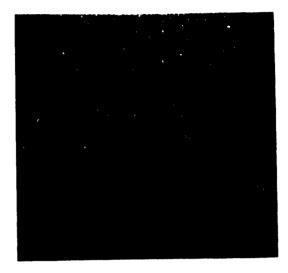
Reproduction (5X) of a radiograph of a resistance spot weld with a 0.003" nickel foil insert. This spot weld (No. 3) was located in a weld test panel (No. CP61A). The material used to make this panel is identical to the material used to fabricate the fatigue specimens (example, LA32N). This weld panel represents the as-welded condition (not stressed). Note that no internal dark images exist in this reproduction.
